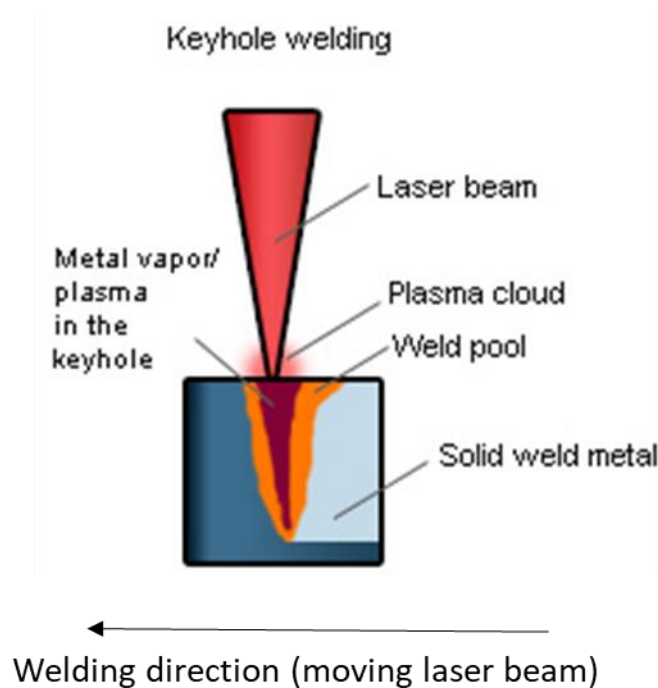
Schematics of the keyhole mode of laser welding [40]
